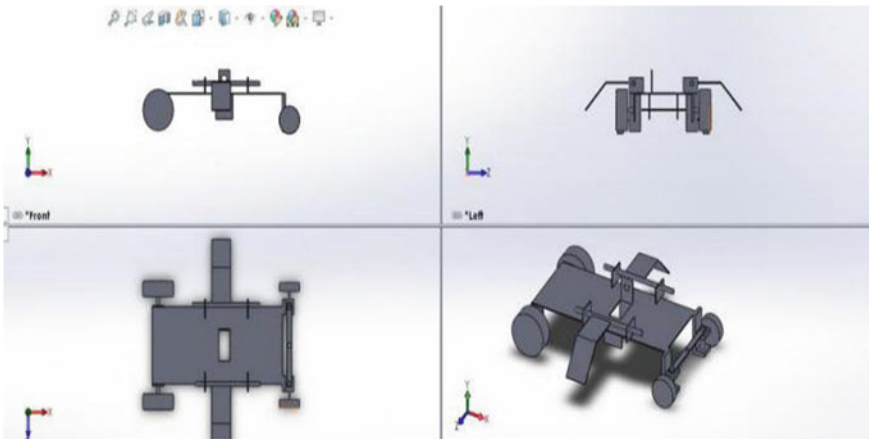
3D modelling of magnetic plate handling truck parts and assembly
